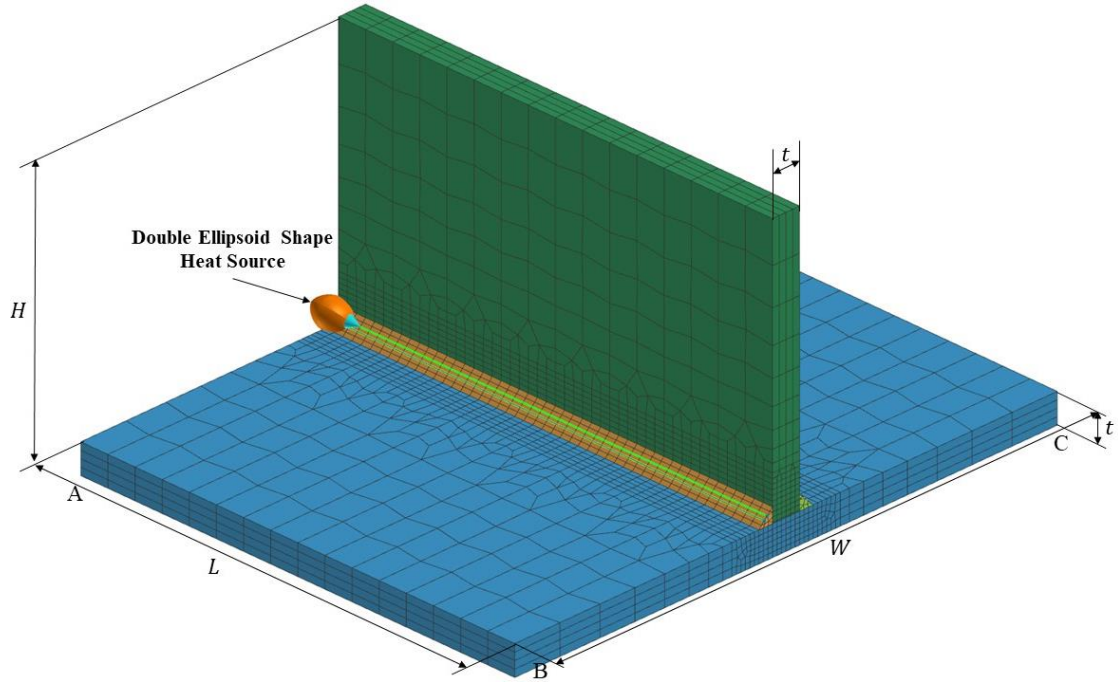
FE Model with Dimensions and Boundary Conditions of T-Joint Welding
